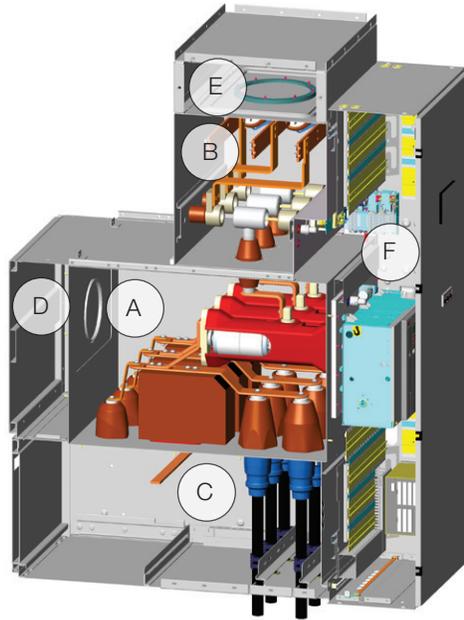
Feeder panel 2000 A, single busbar at rear
